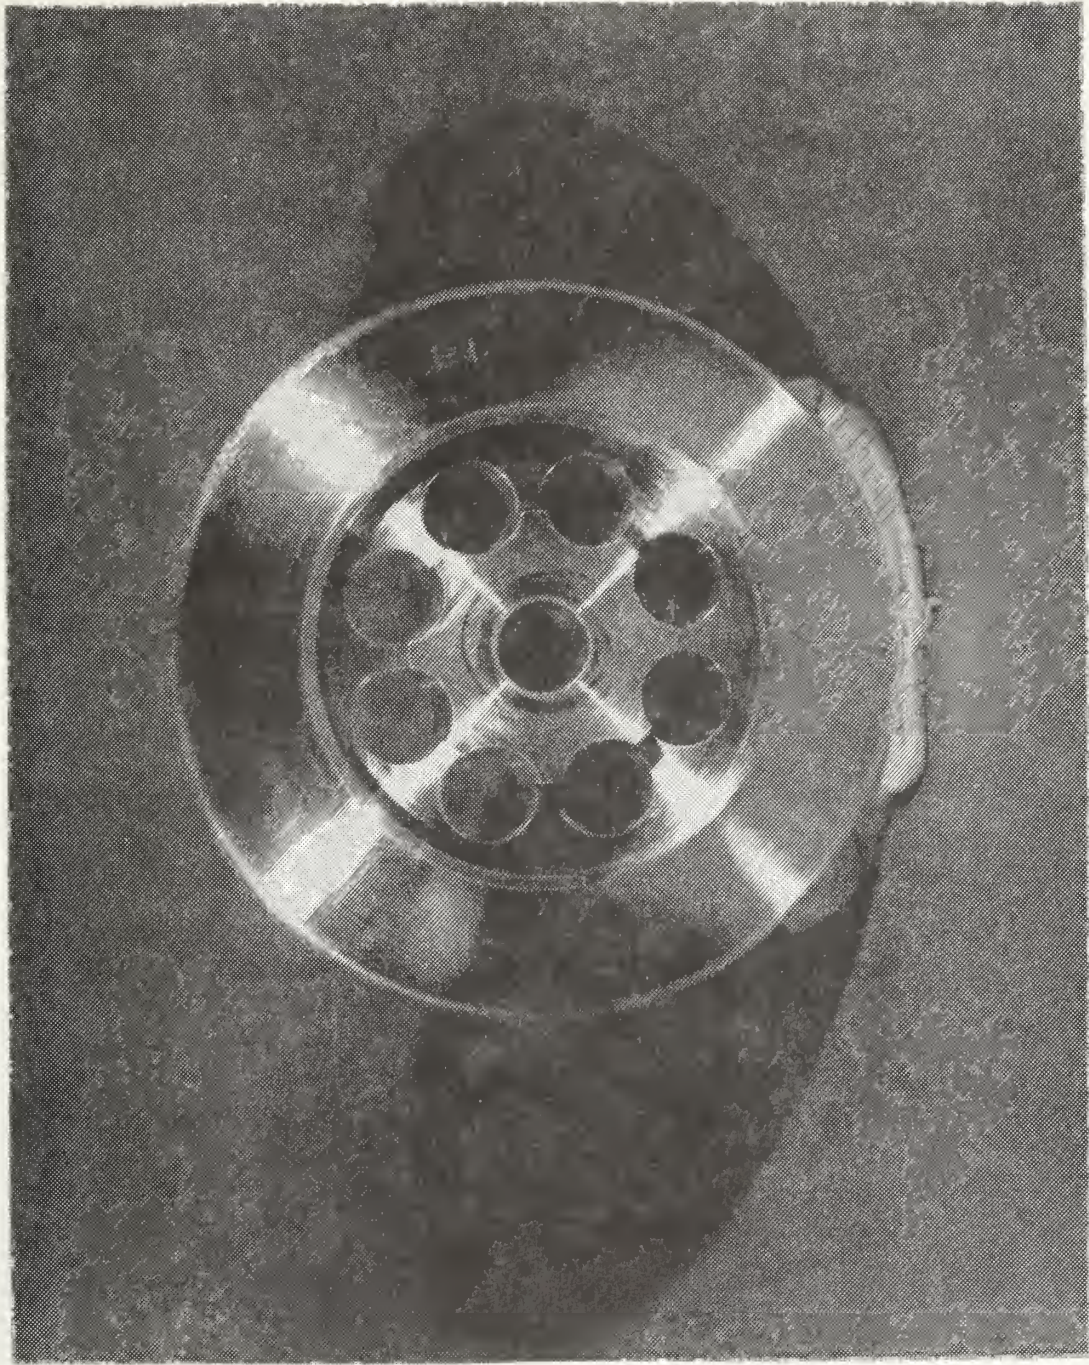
END VIEW PHOTOGRAPH OF SINGLE NOZZLE RING (COURTESY NWC, CHINA LAKE)
